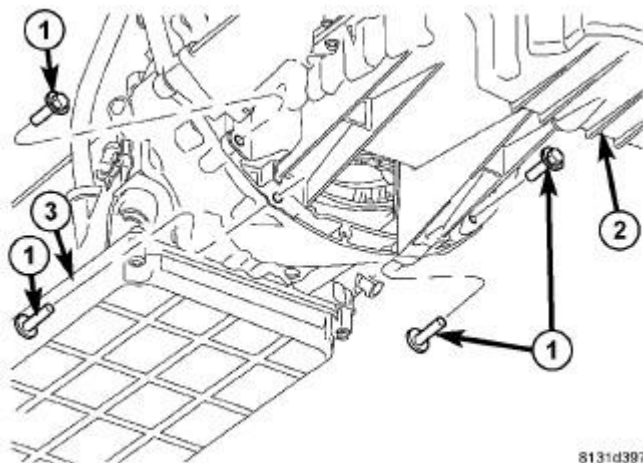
Remove/Install Transmission To Oil Pan Bolts
